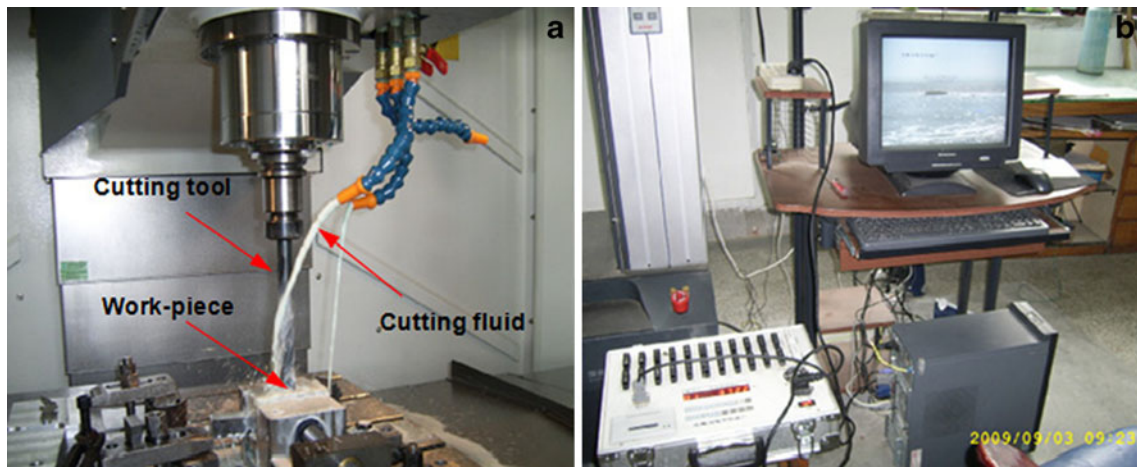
a Drilling operations on the workpiece material and b data measure equipment used in the experiments
